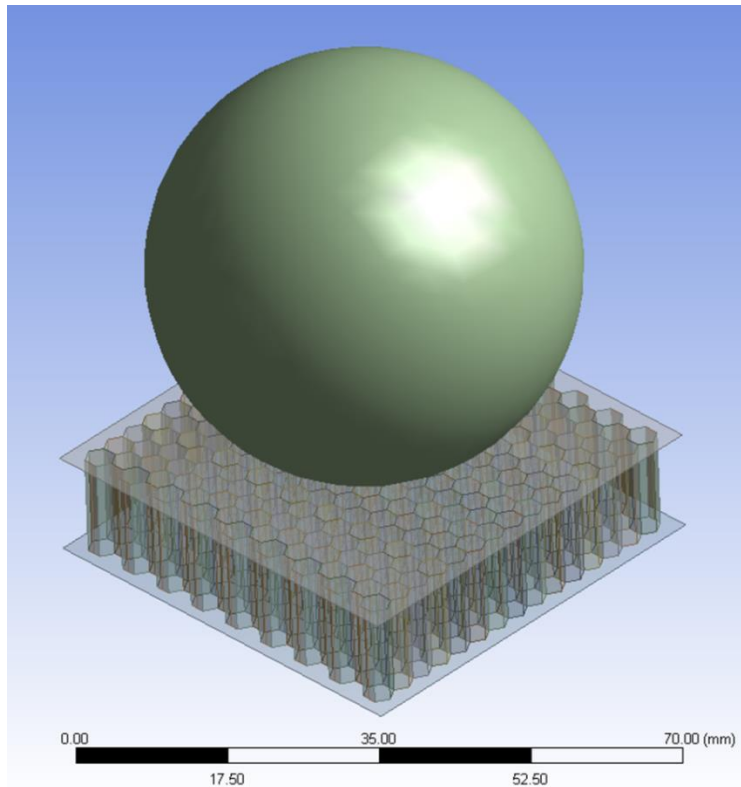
Geometry of honeycomb sandwich panel section and impactor
